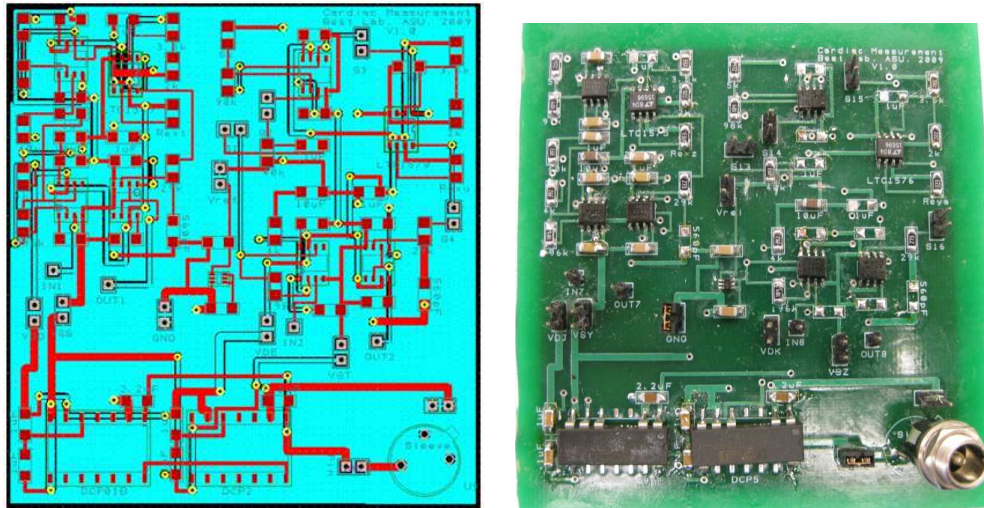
Custom designed printed circuit board layout (left) and picture (right) are shown. The design included the complete circuit chain on the left side of the board and debugging circuit with jumper connection points on the right.
